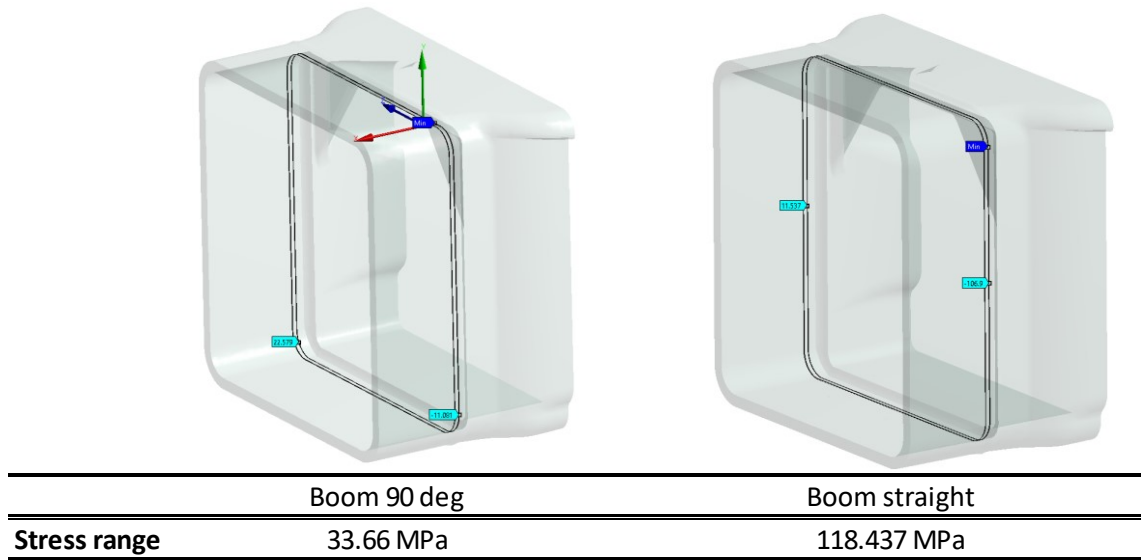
Stresses in weld joint of optimized structure with boom in 90 degree angle and straight boom.
